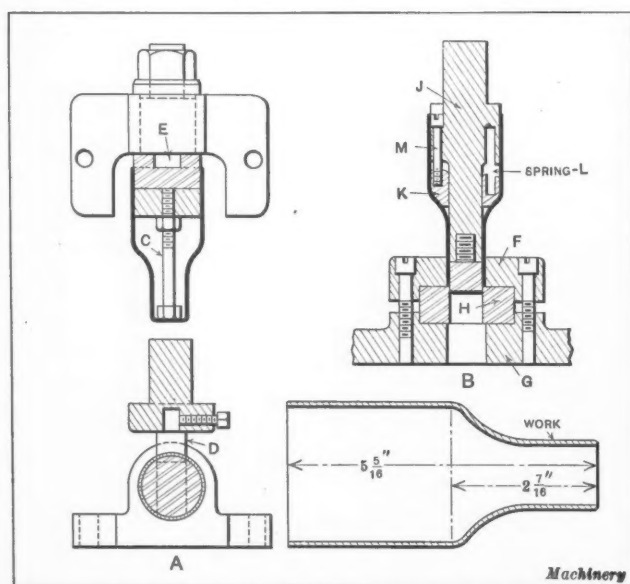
(A) Die for trimming Large End of Shell. (B) Die for punching Hole in Small End
